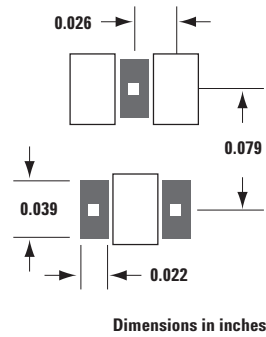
Recommended PCB Pad Layout for Avago's SC70 3L/SOT-323 Products.
